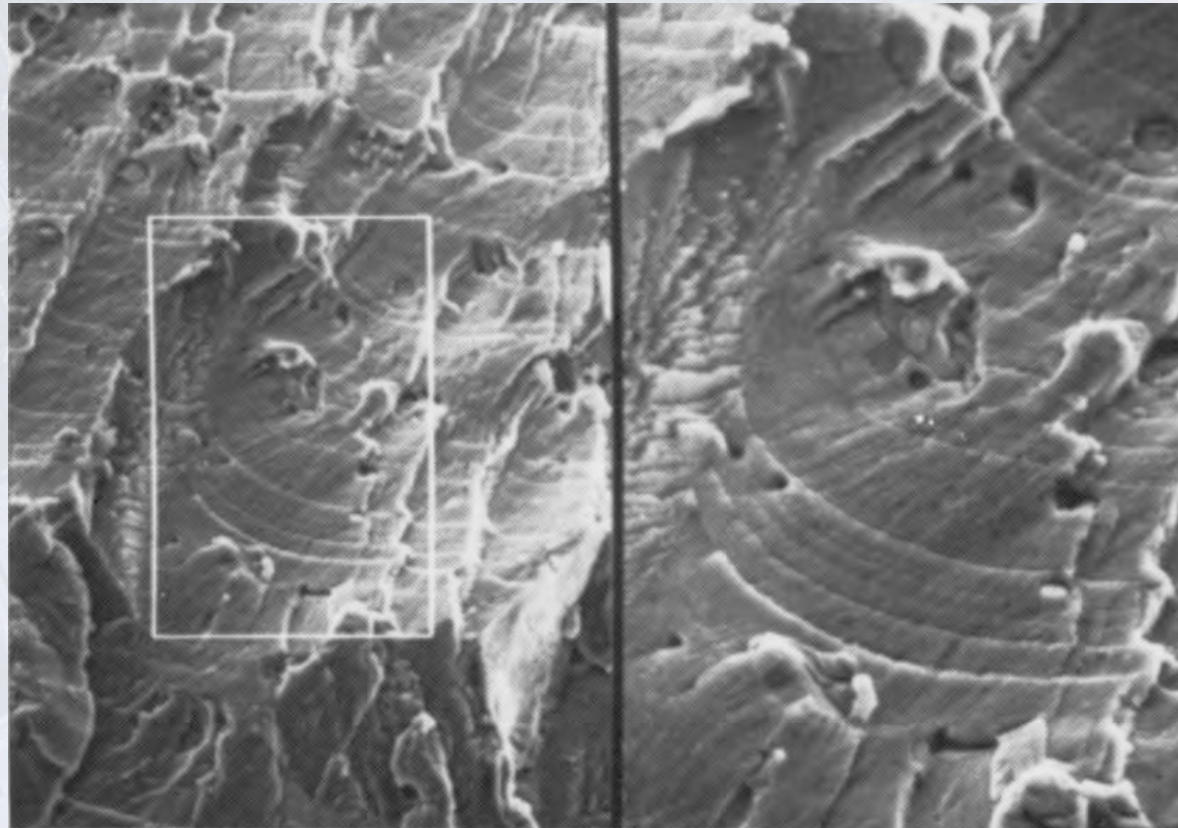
Typical fatigue-fracture surface on metals, showing beach marks. Magnification: left, 500x; right, 1000x. *Source:* Courtesy of B.J. Schulze and S.L. Meiley and Packer Engineering Associates, Inc.
